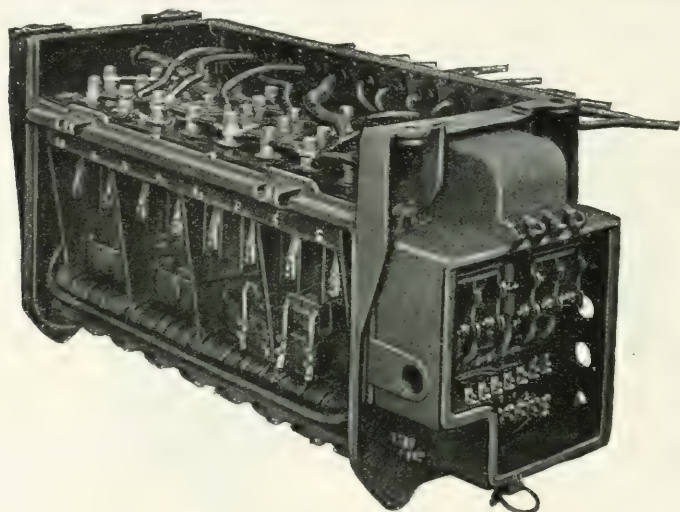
UNIT SWITCH GROUP WITH COVERS REMOVED
